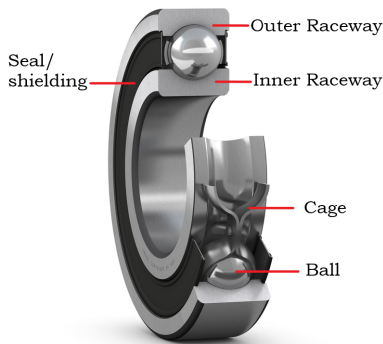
Deep groove ball bearing with a seal. Adapted from [2].
